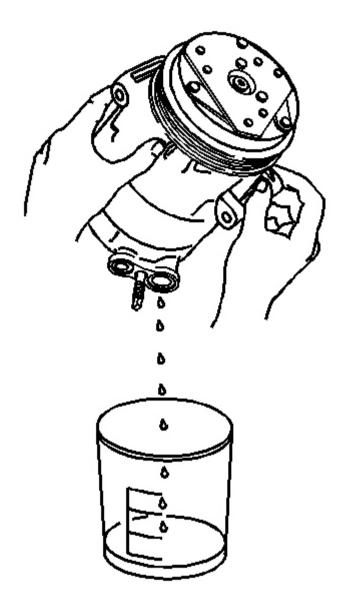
Draining A/C Compressor Oil Courtesy of GENERAL MOTORS CORP.
